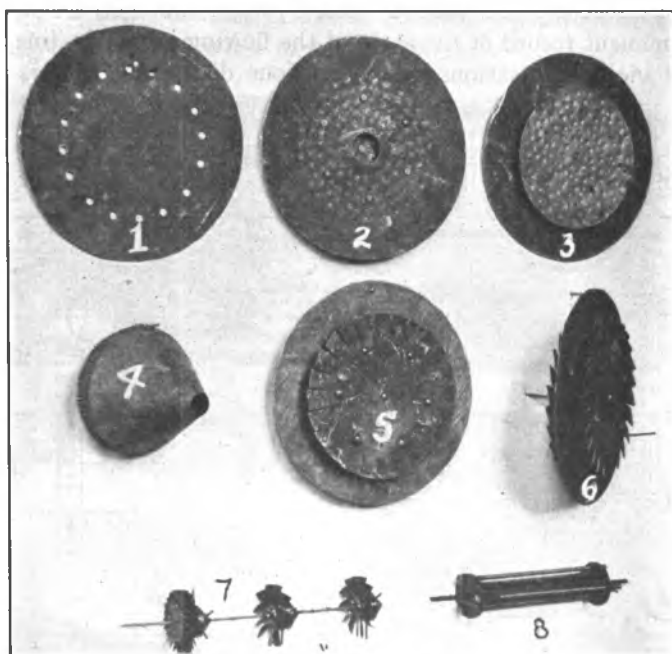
MUFFLER DISKS, FAN UNITS, AND SMALL QUIETING DEVICES
